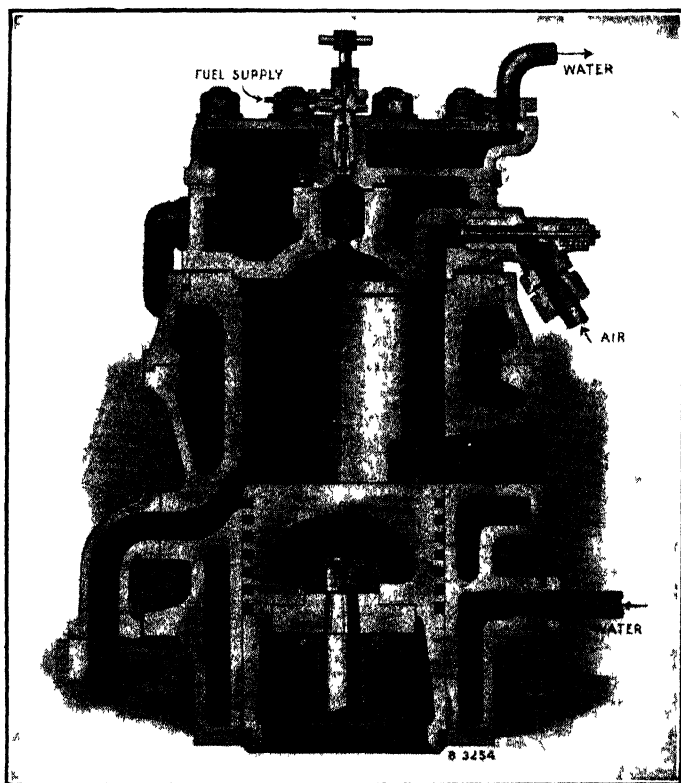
Sectional View of 30 H.P. Worthington Cylinder and Cylinder Heads and Immediate Attachments
